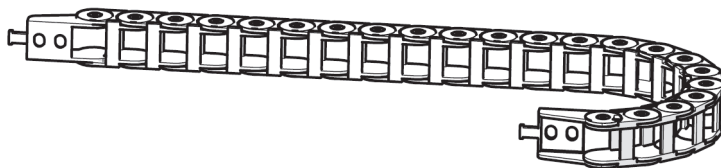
Cable tray partsTable 27 Cable tray component part numbers
